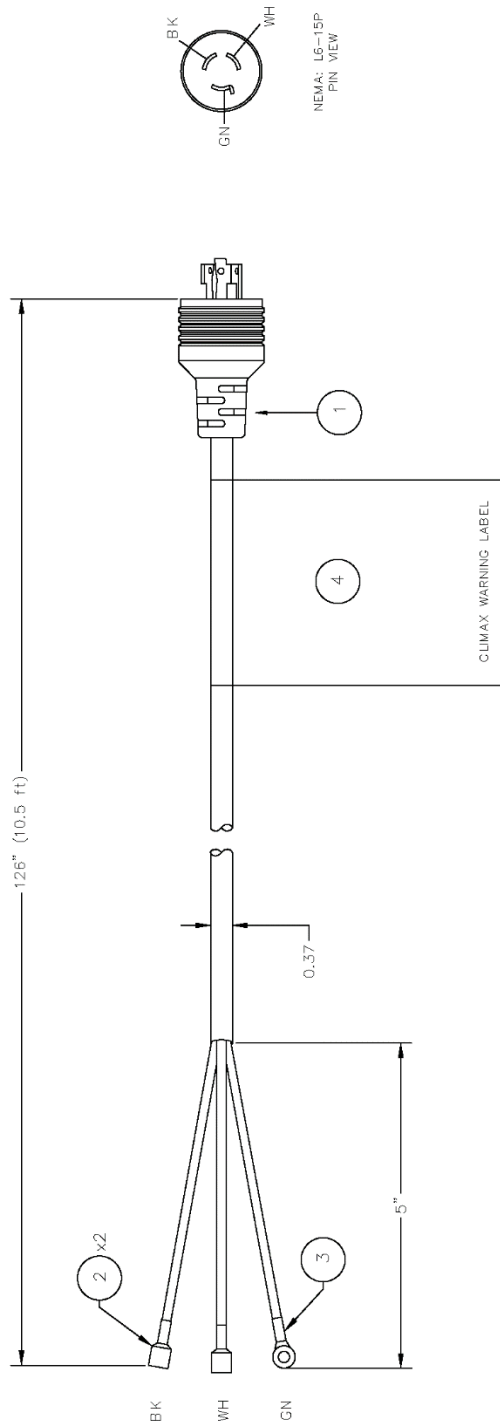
POWER CABLE ASSEMBLY BB5000 EIBENSTOCK 2ND GEN 120V DOMESTIC L5-30P PLUG BOM (P/N 88652)
